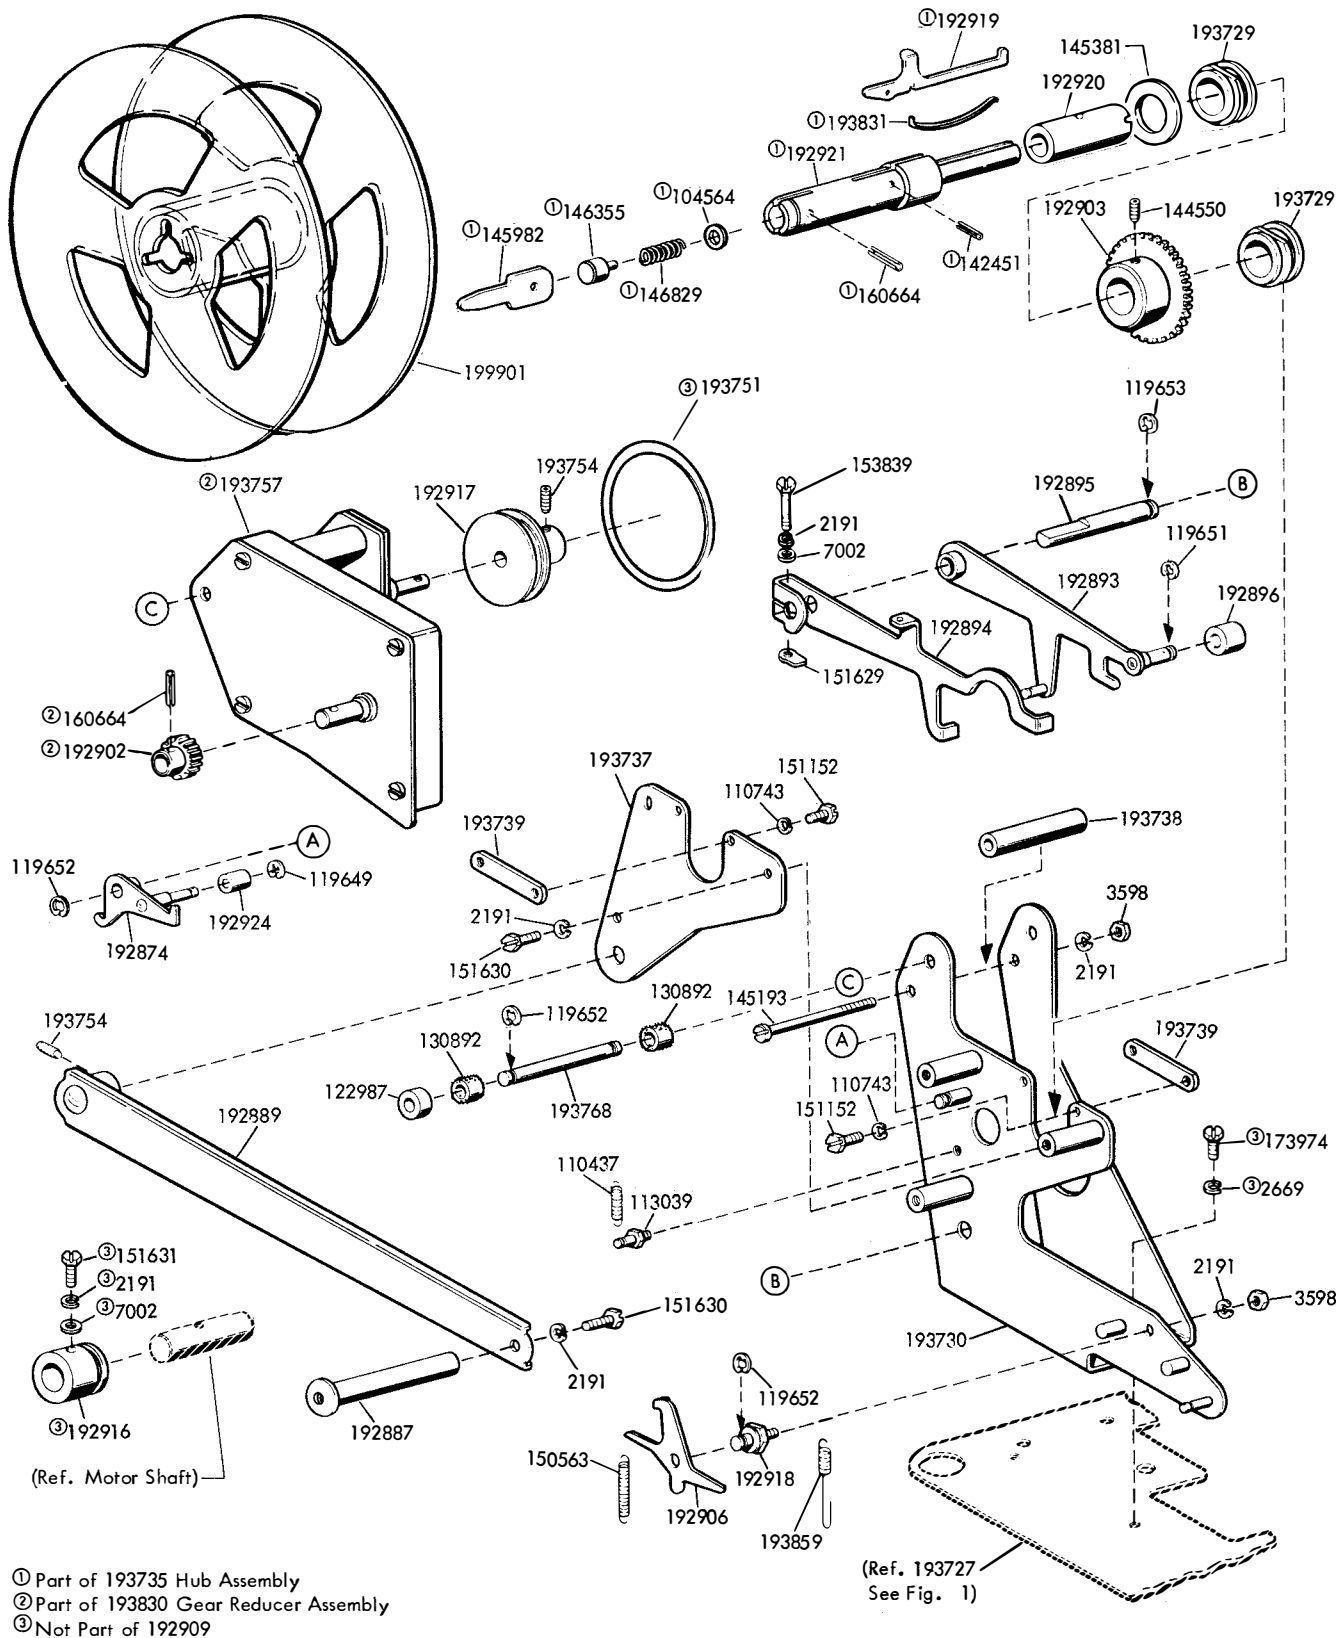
192909 TAPE WINDER (1" TAPE)
